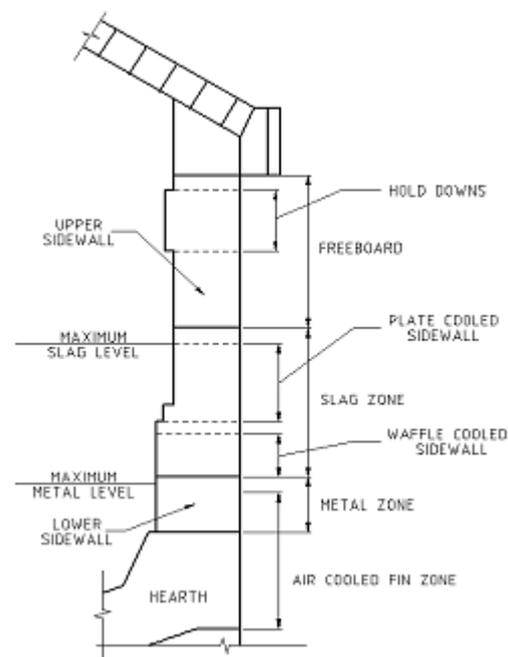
Typical Cross Section Schematic Through Furnace Sidewall
